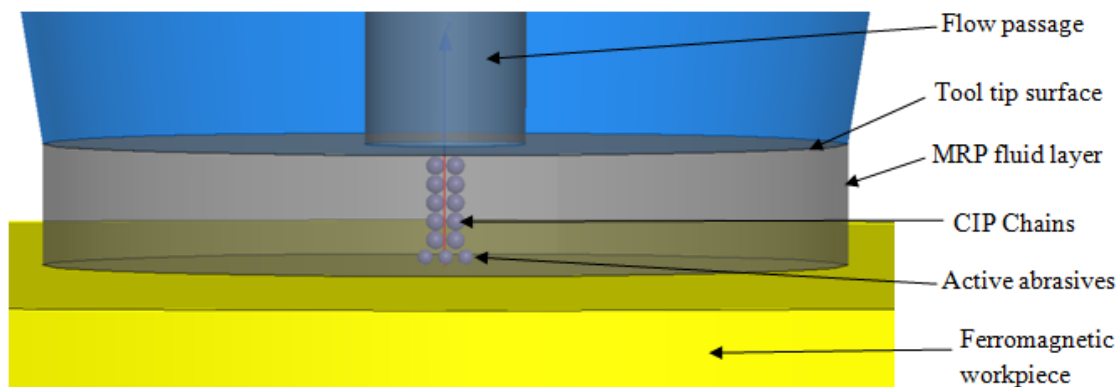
CIP chains arrangement in the working gap with hollow core tool
